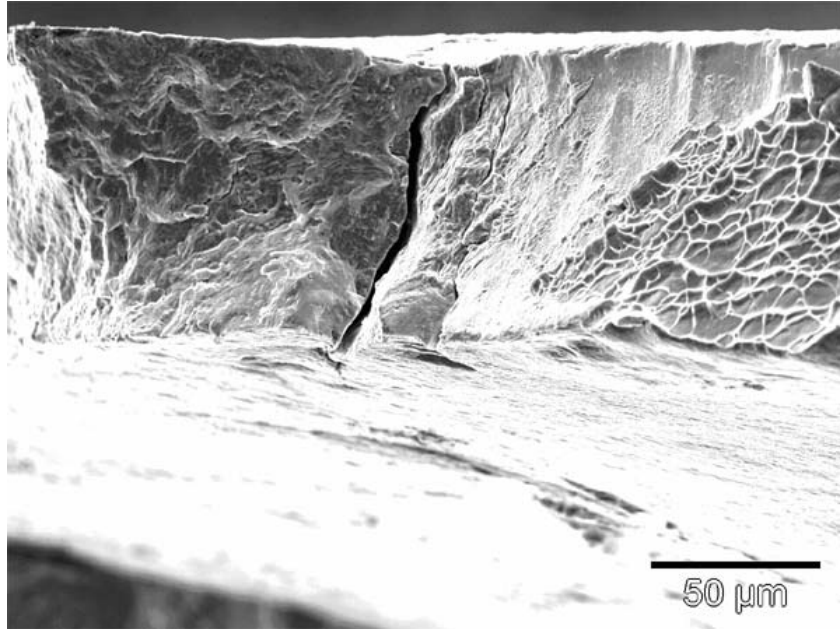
Crack found after fatigue test in resistance weld 7
